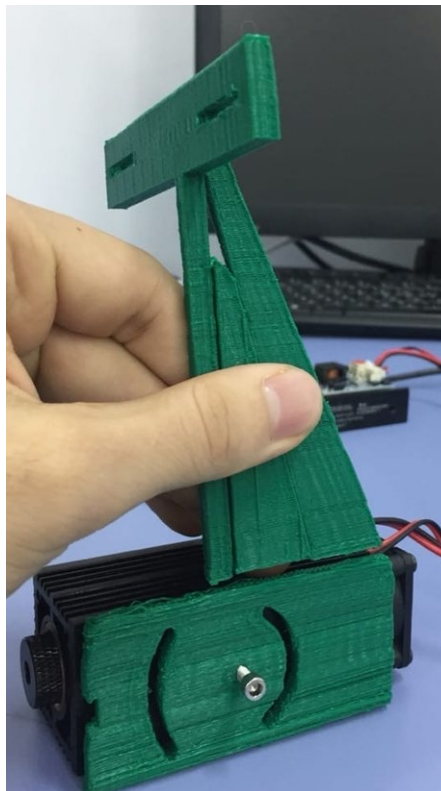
The unsuccessful print initial design of laser frame (design#1)
